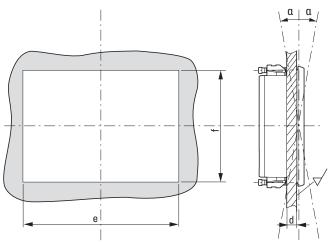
Dimensions in mm (inches); tolerance: ±0.2 mm
